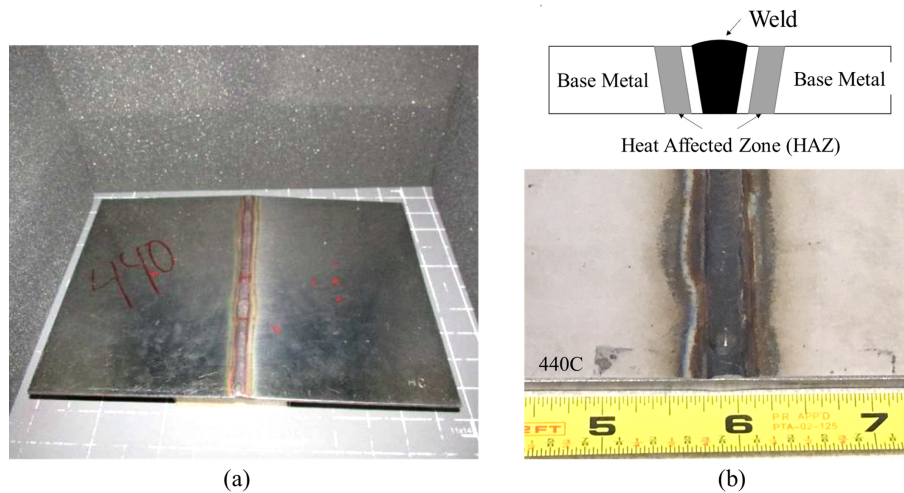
A welded AISI 440C steel plate for evaluating the method of using IIRT for non-destructive sensitization detection. (a) A photo of the entire welded plate. (b) A schematic drawing of a cross section through the weld line, and a close-up photo.
